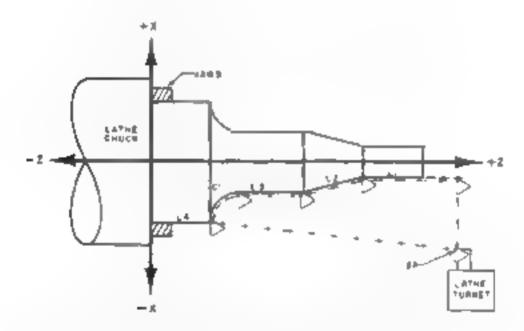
The path of the nuttrag tool prenter of the nose radius) for turning the workpiece in Fig. 15-18.
